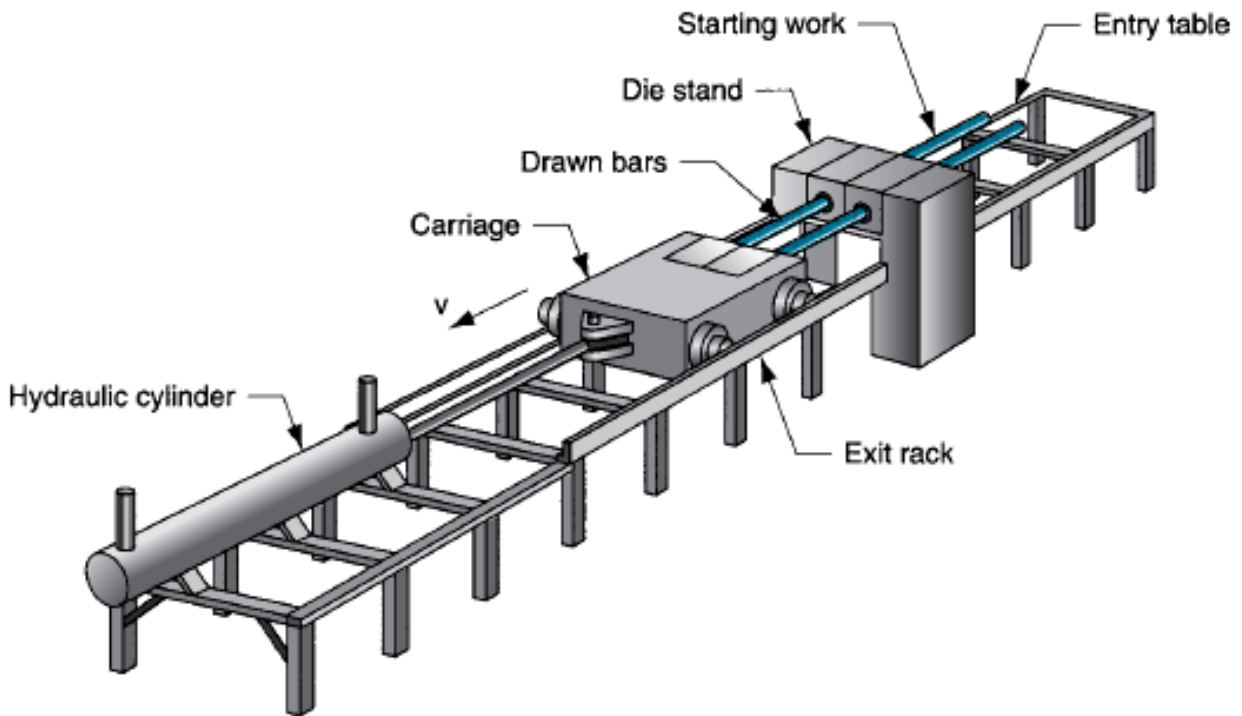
Hydraulically operated draw bench for drawing metal bars.
